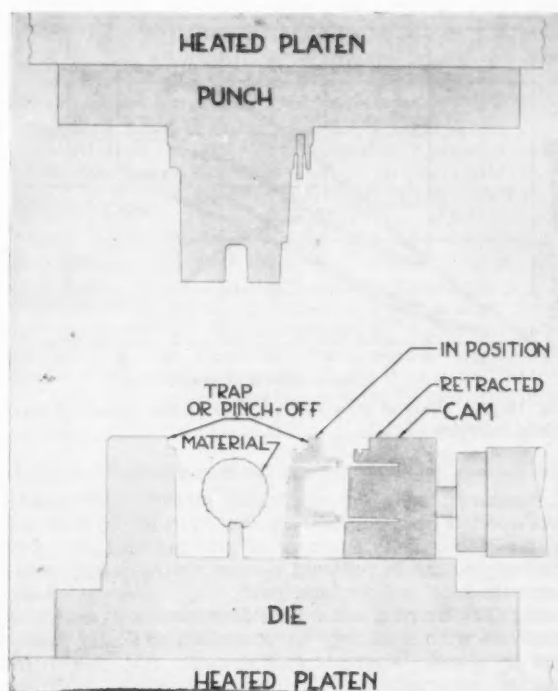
Premixed molding compound is shown in place in an open matched metal die. There is just enough material to fill the die completely.
